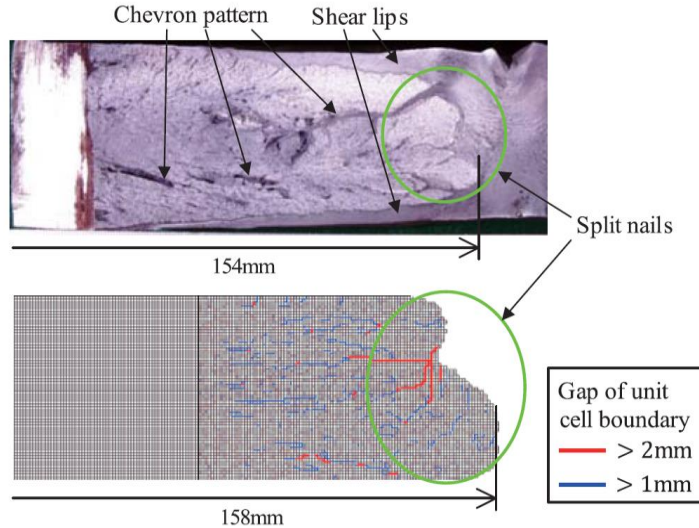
Macroscopic fracture surface of the experiment and simulation [183]
